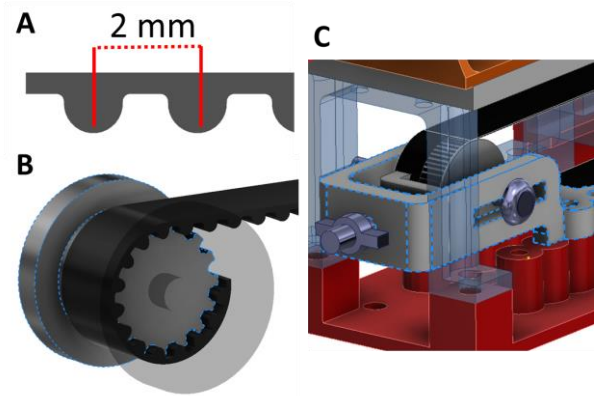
A) GT-2 belt. B) Belt and pulley system. C) Belt tensioner mechanism.
